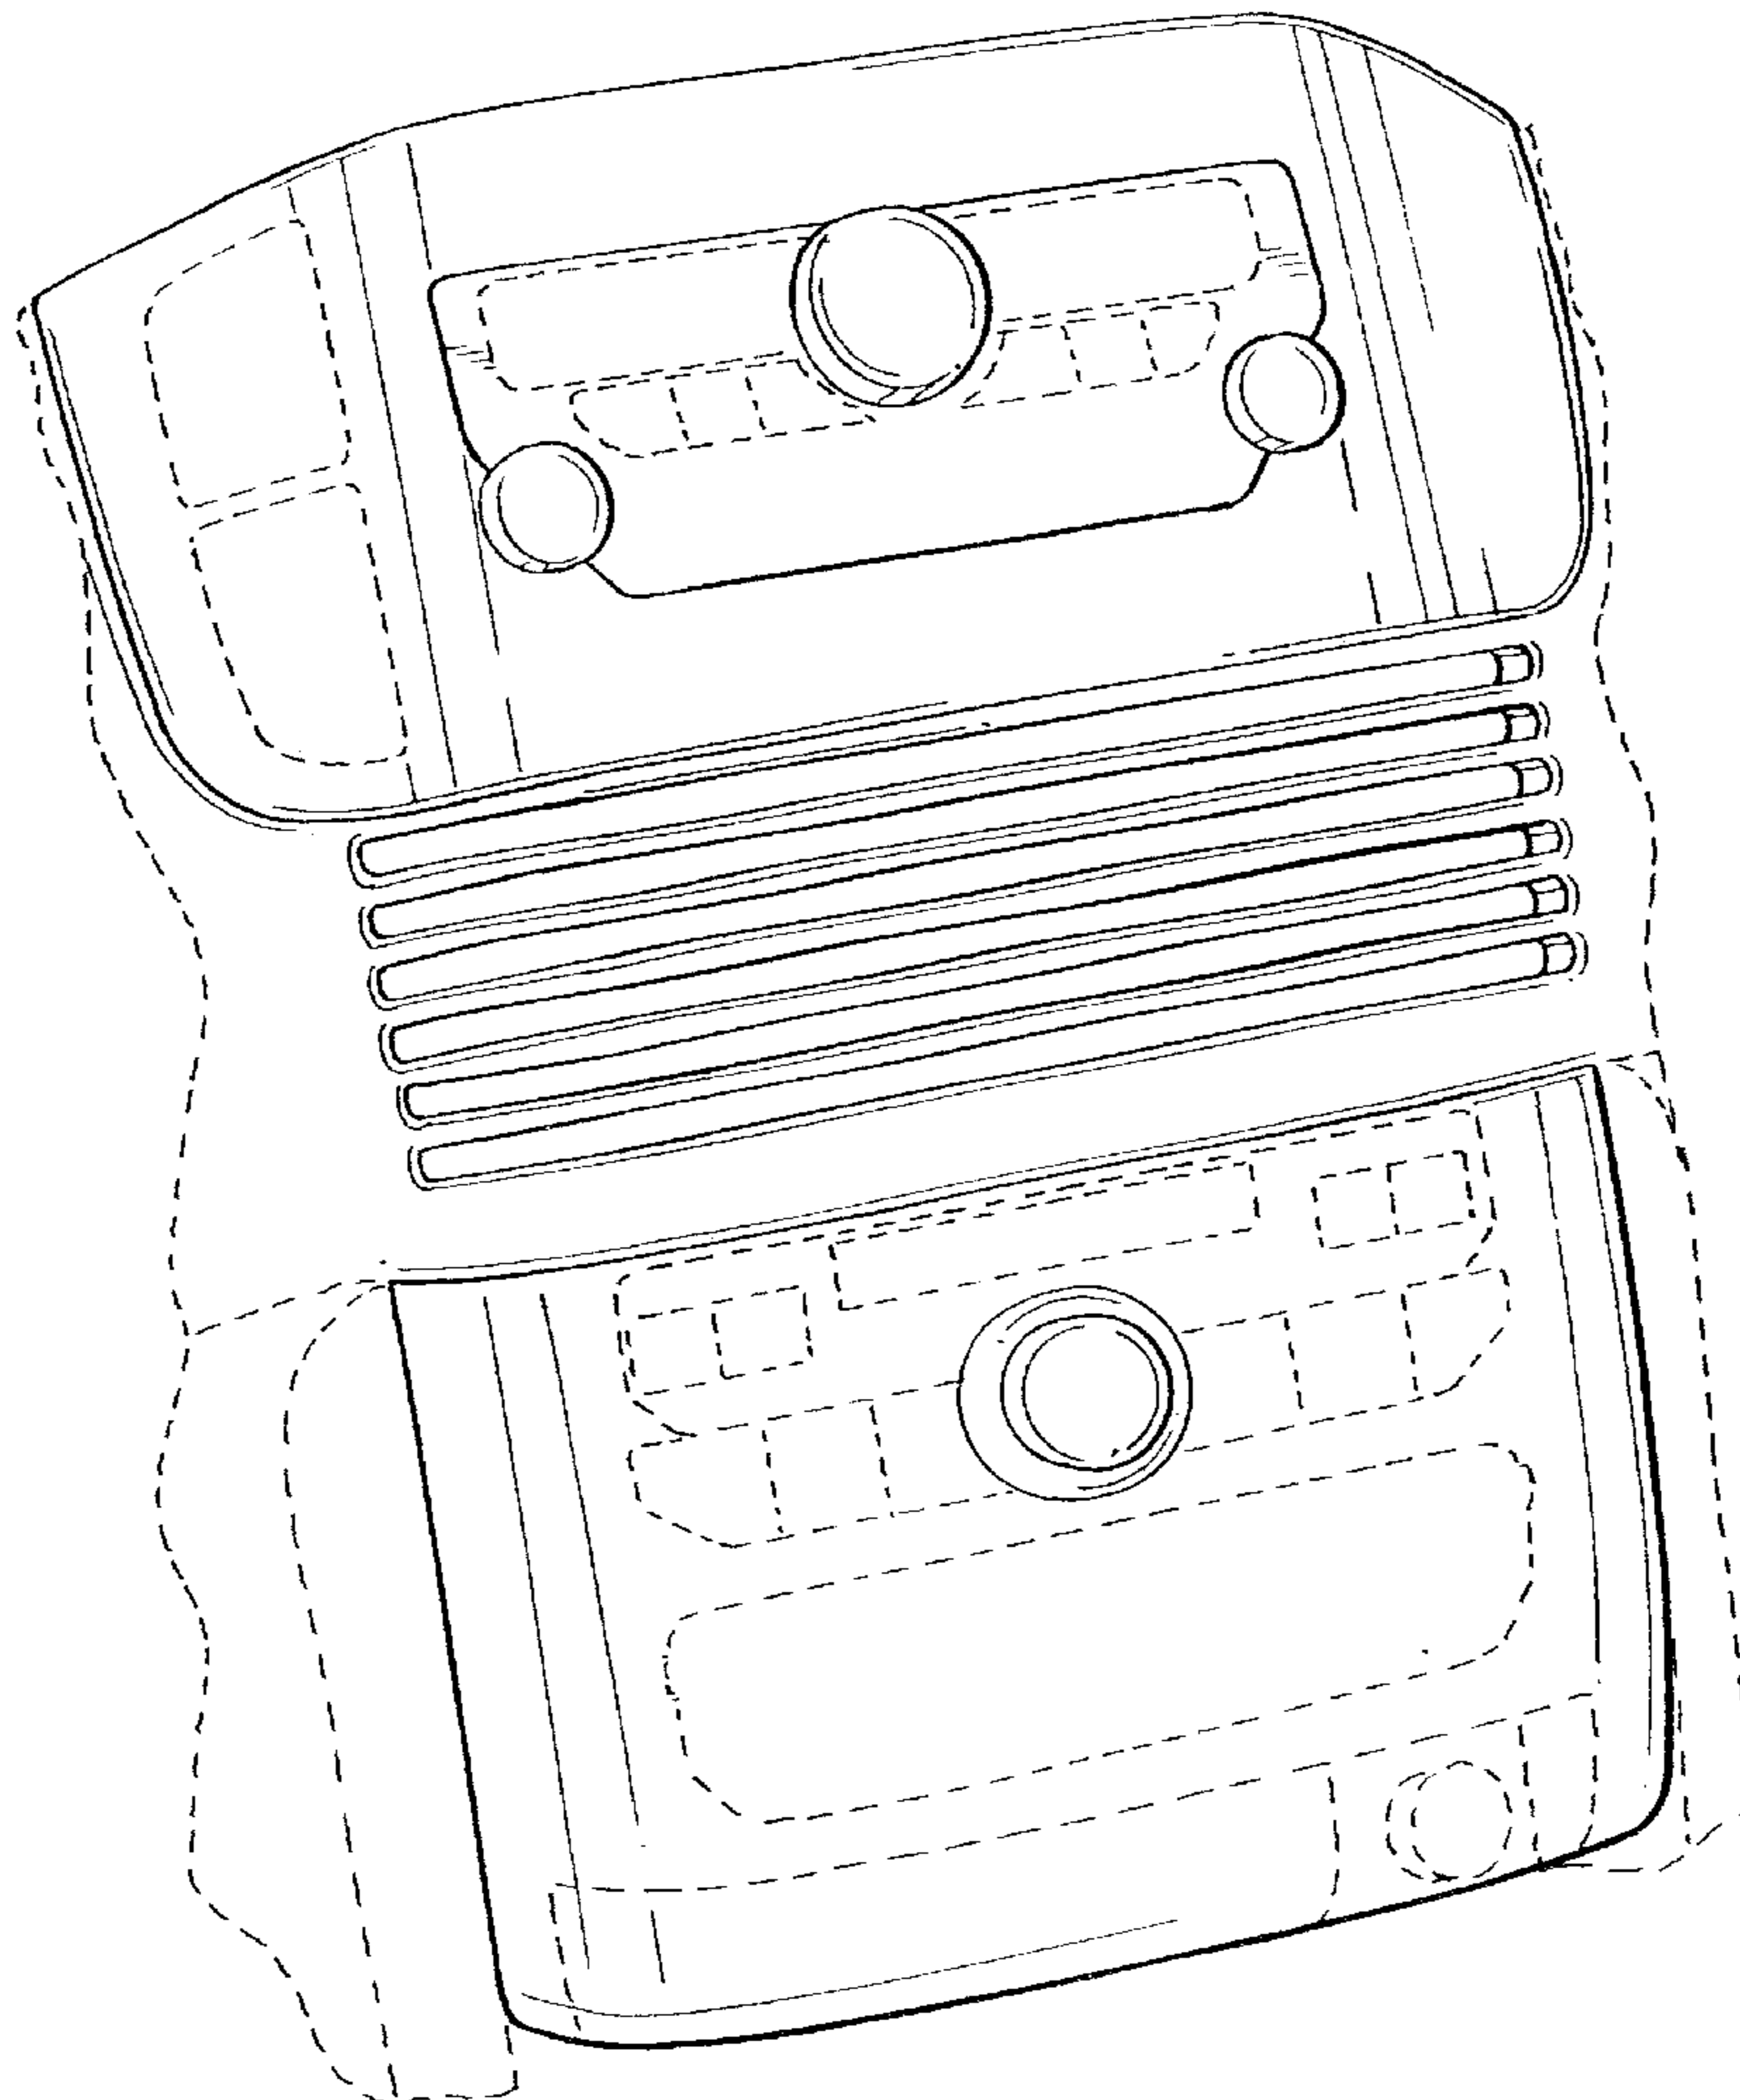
is a perspective view of one embodiment of an instrument panel showing my new design; and, FIG. 2 is a perspective view of a second embodiment thereof.
